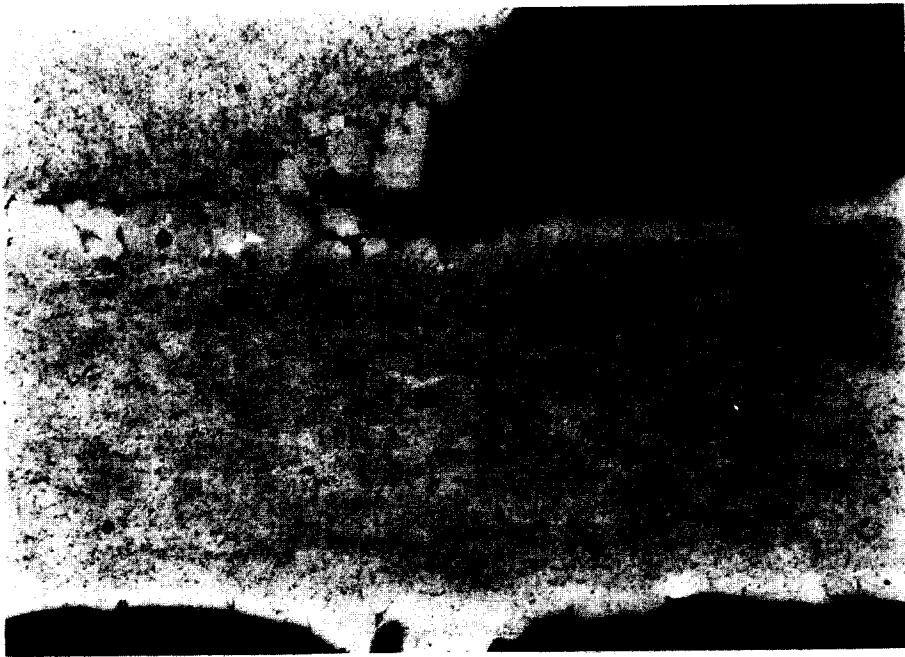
Cracking initiating at the braze joint fillet of layer 85.
